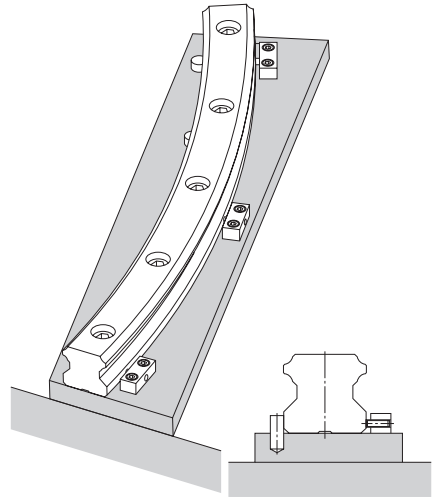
Method for Securing the LM Rail Using a Pin as a Datum Point
